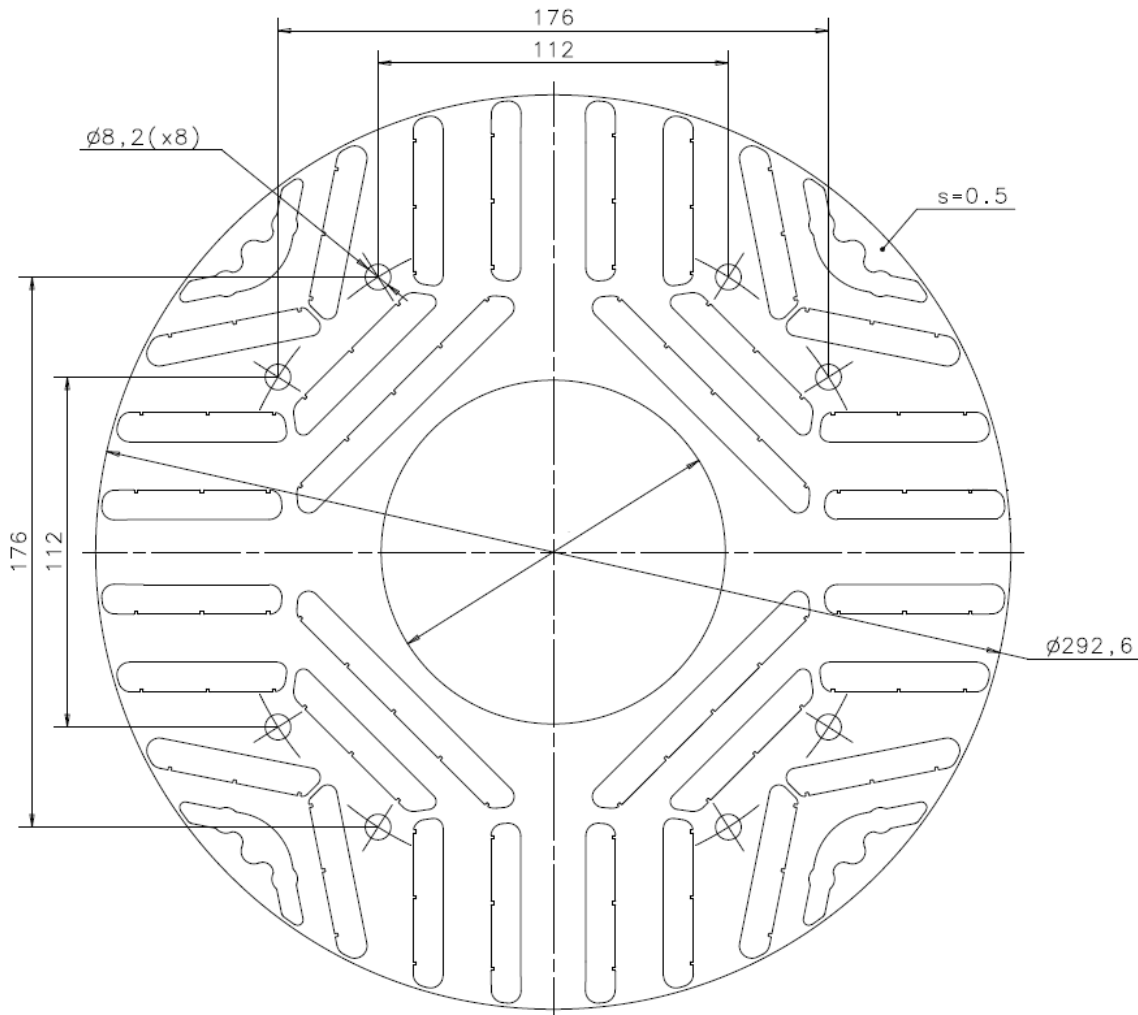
Two-dimensional drawing of PMASynRM 250 prototype rotor sheet.
